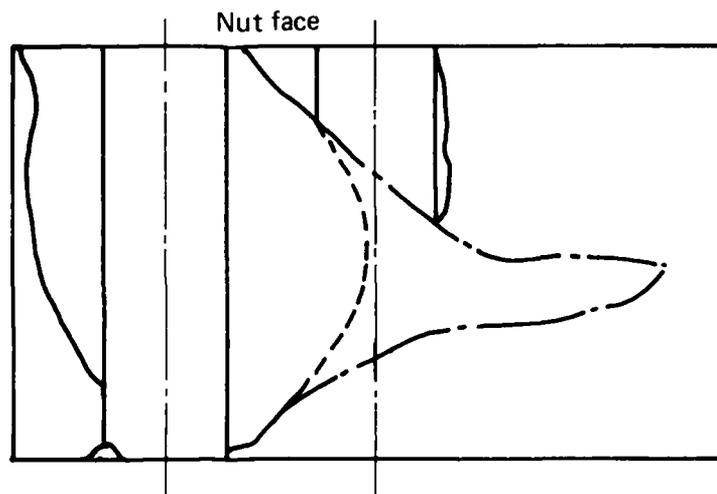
(c) FRACTURE SURFACES SPECIMEN TYPE (D)
